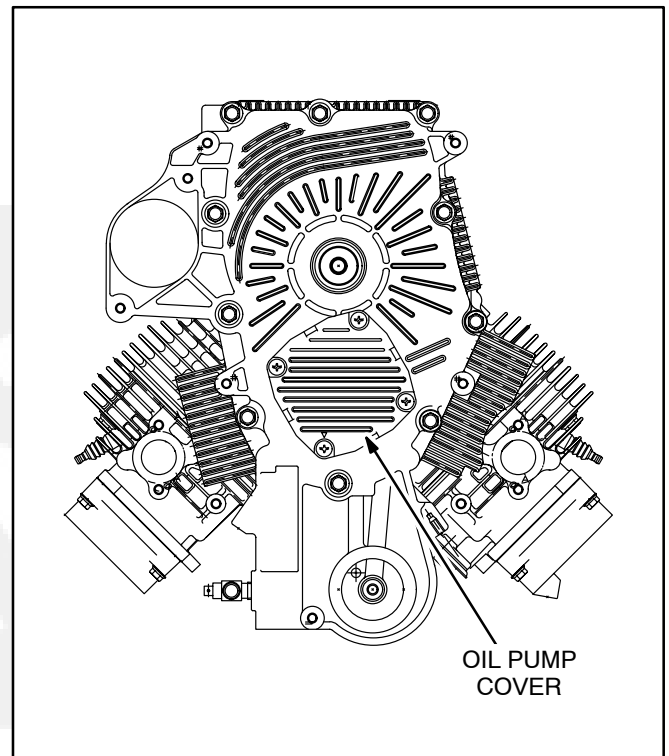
OIL PUMP COVER (ENGINE BOTTOM)
